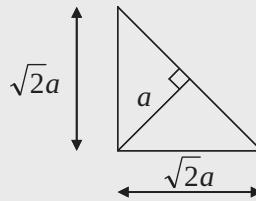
Effective throat thickness of the fillet weld
